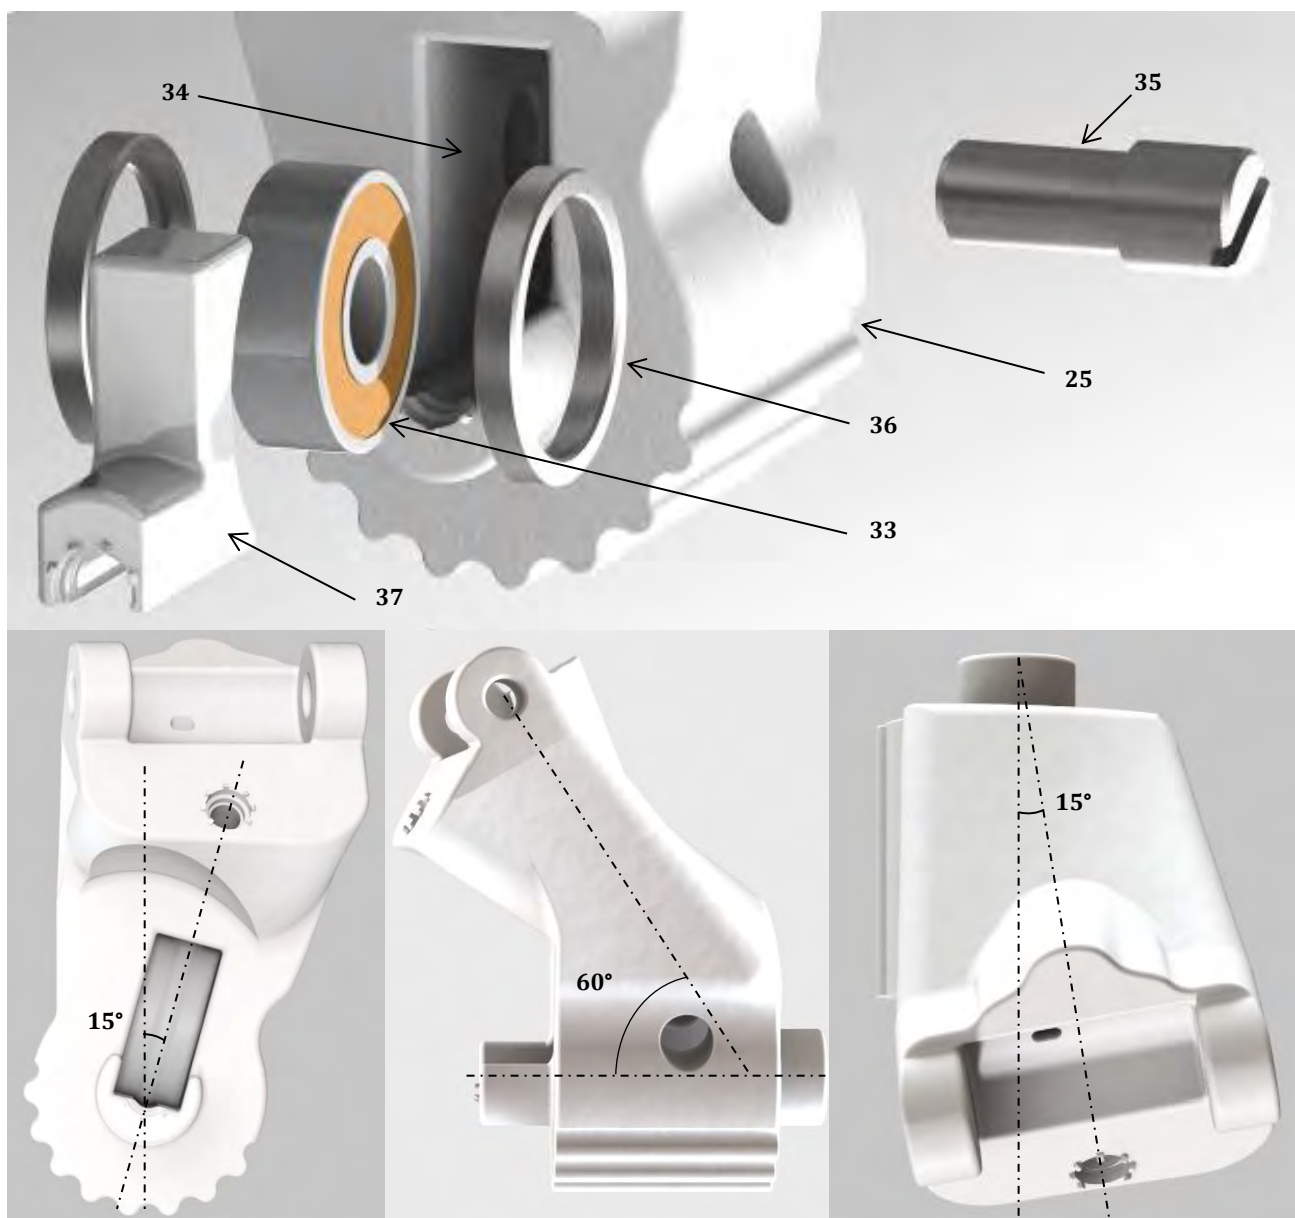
Exploded view of the thumb bearing assembly (top) with anterior, lateral and superior views of the thumb (bottom left to right respectively).
